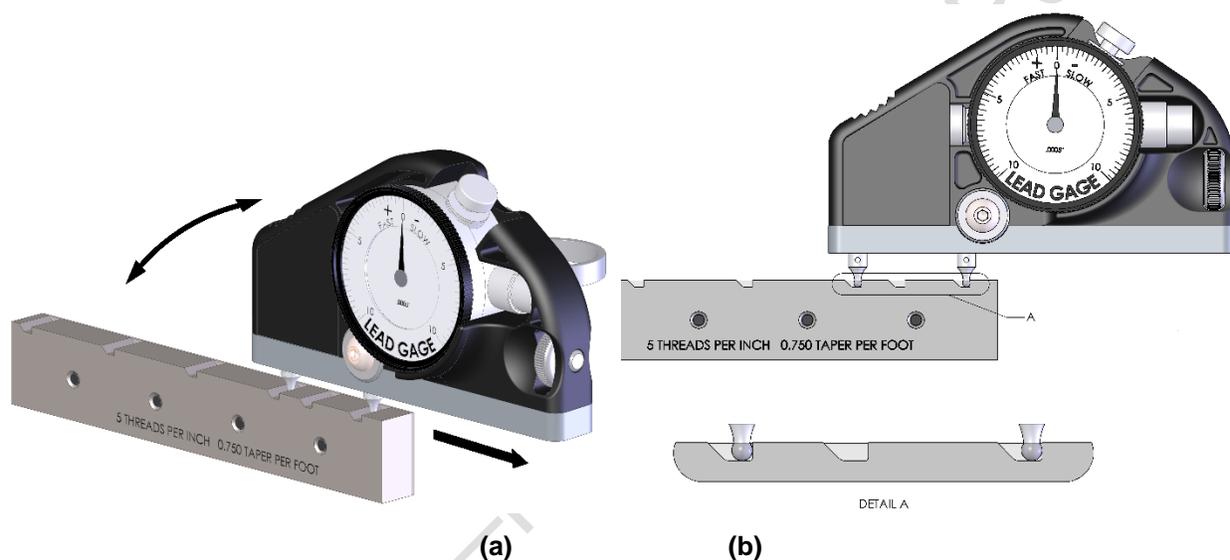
Lead Setting Standard with Lead Gauge Applied—Buttress Threads
